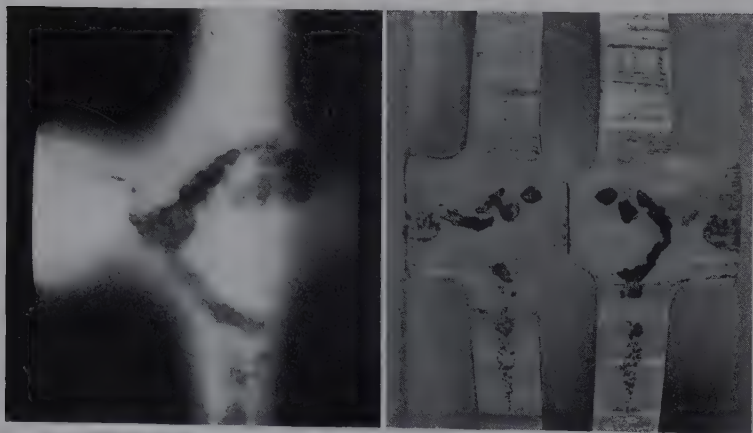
Defects in aluminum-alloy sand casting discovered by radiograph and verified in sectioned specimen. (*General Electric X-Ray Corporation.*)
